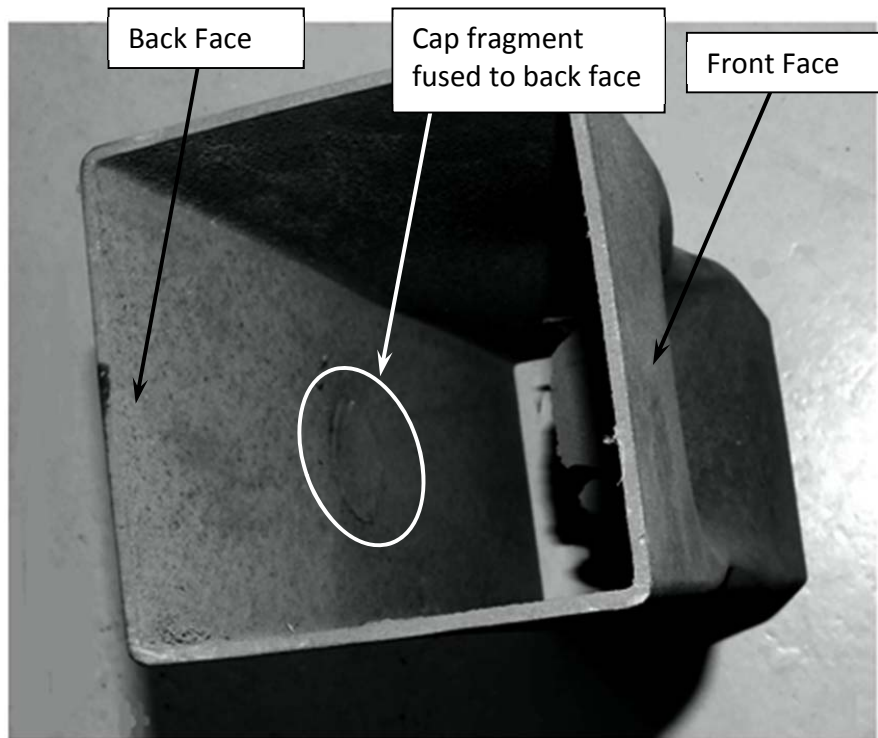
Picture showing capping failure on front face with fragment welded onto the back face [39]
